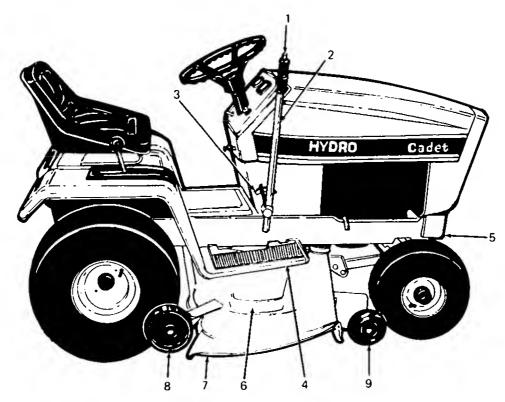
MOWER DECK PARTS AND ATTACHMENTS (44 inch deck shown)
